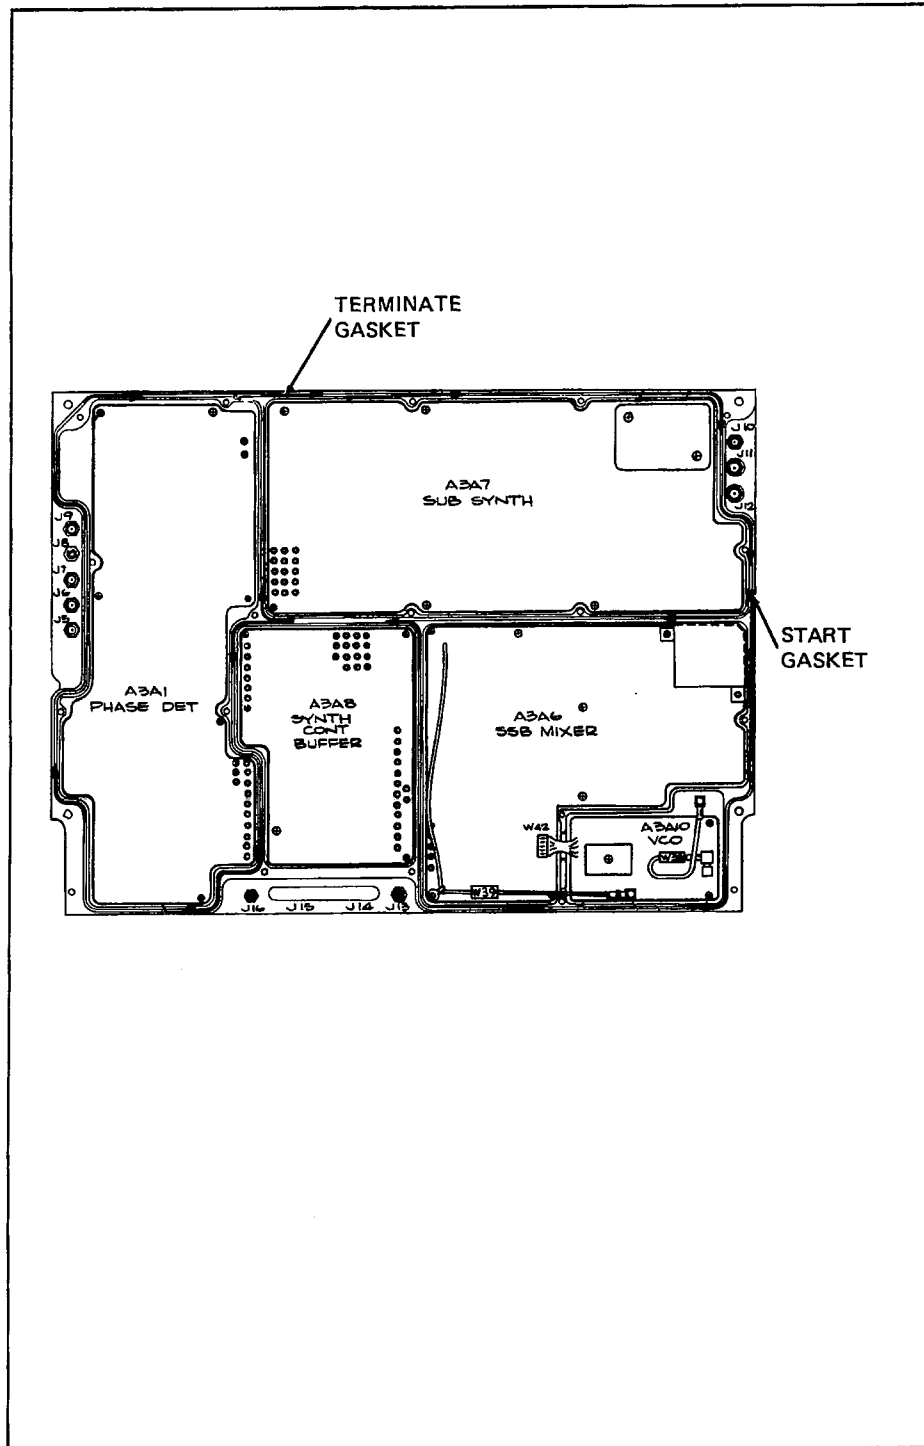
RF Gasket Positions - Bottom of Synthesizer Module
